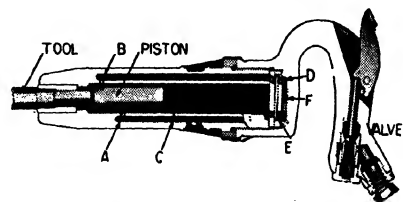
Air hammer. (Courtesy Ingersoll Rand Co.)
